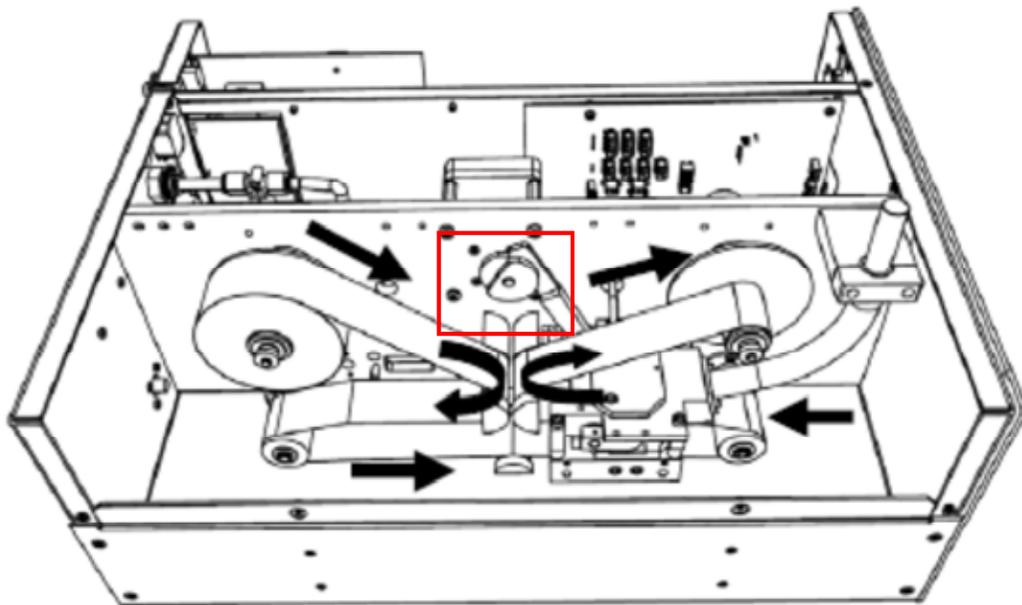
Filter Tape Assembly. The Cam is located in the center of the filter tape assembly.
